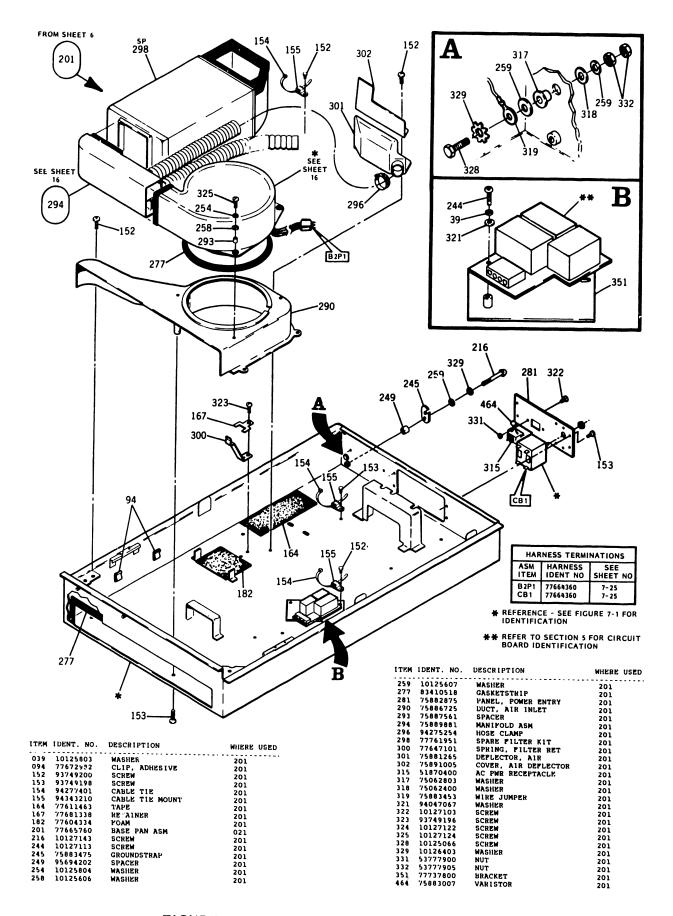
BASE PAN ASSEMBLY (1 OF 2)
